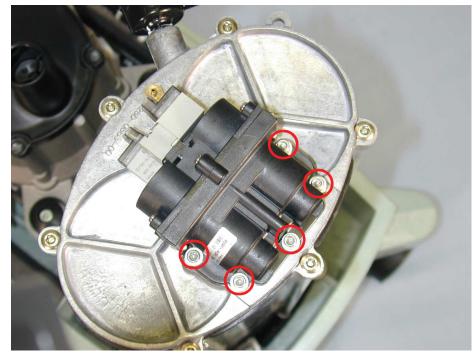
FIGURE AS: LOCATION OF THE SCREWS SECURING THE VALVE/SOLENOID ASSEMBLY
